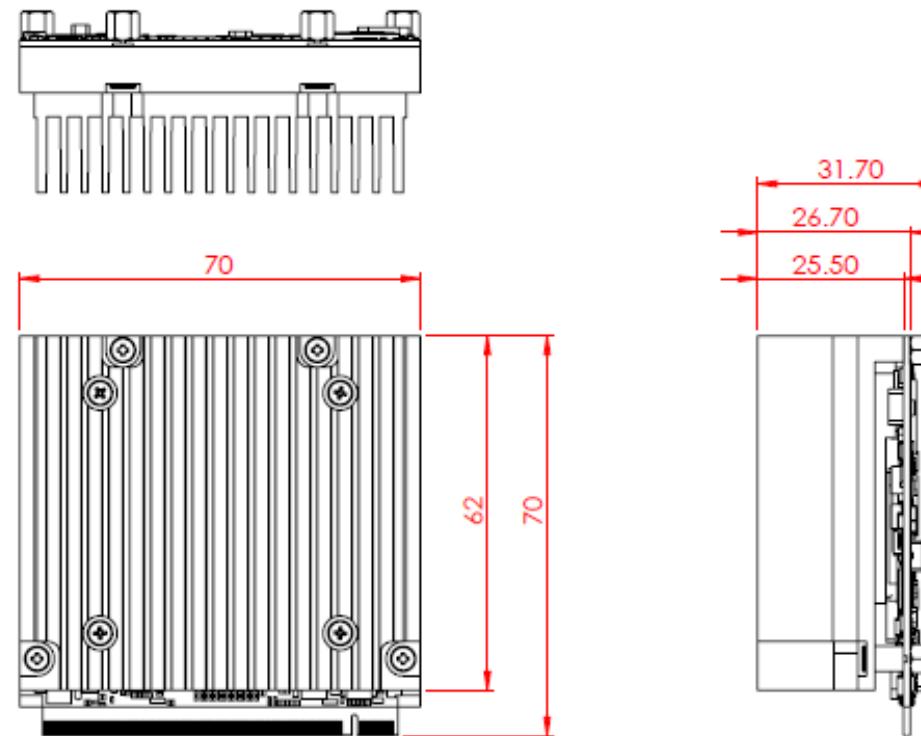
Heat sink / cooler for EHL X & N/J Series mechanical dimensions
